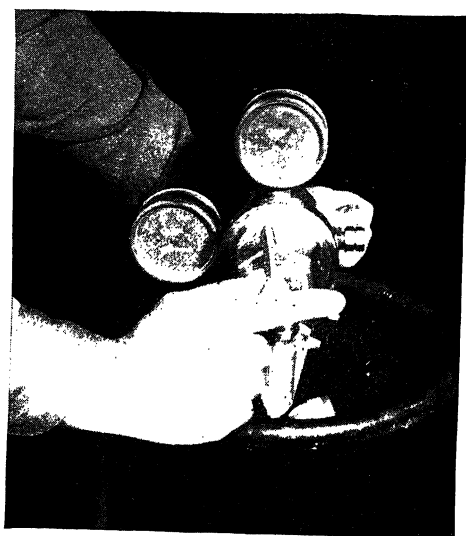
Fastening acetylene regulator to tank. (*Courtesy of Linde Air Products Co.*)
